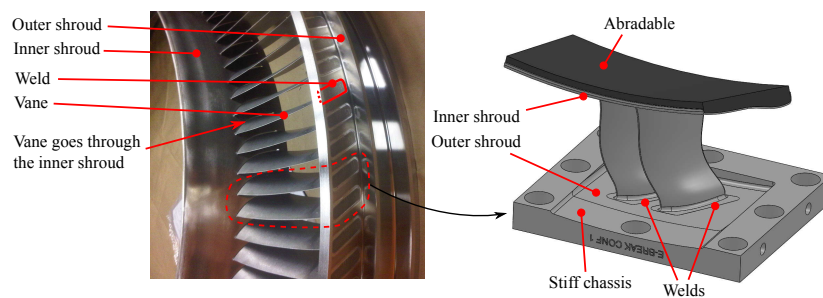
A subset of the IGV assembly is tested, containing a pair of vanes, a part of the inner and outer shroud and the abradable (picture SAB).
